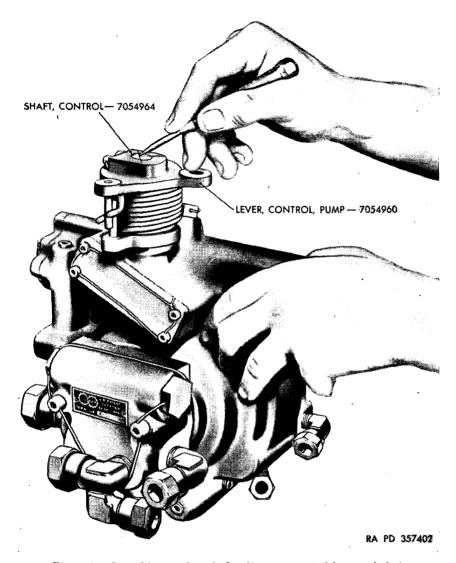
Scratching mark on hydraulic pump control lever and shaft.
